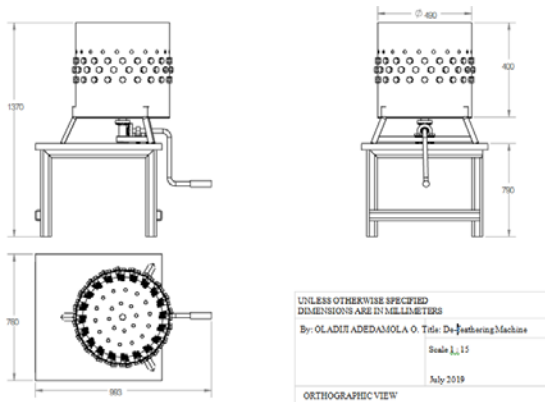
Orthographic View of the Manually Operate De-feathering Machine
